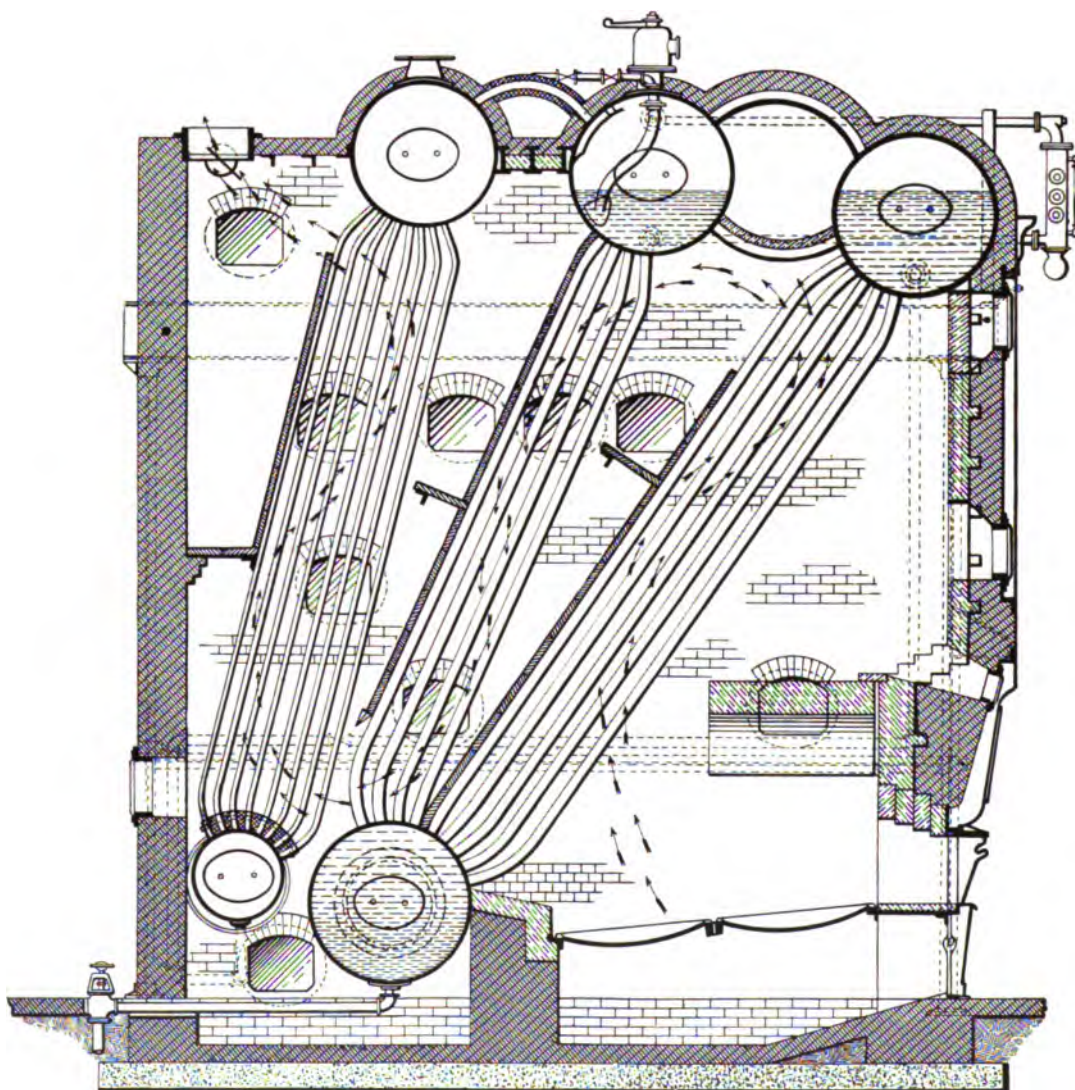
SECTIONAL SIDE ELEVATION OF STIRLING BOILER WITH SUPERHEATER IN REAR PASS
